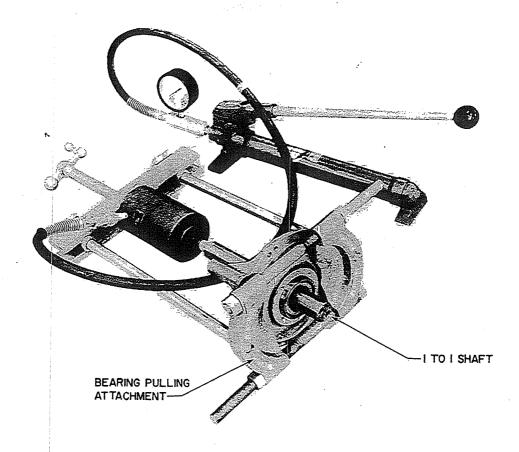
1 to 1 Shaft, Removal of Cover and Pin Assembly GB383 and Cycle Cams GB377 and GB378
